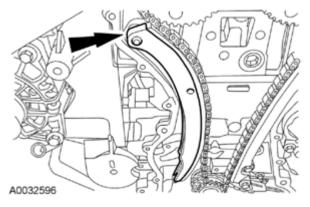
Locating Timing Chain Tensioner Arm Courtesy of FORD MOTOR CO.
